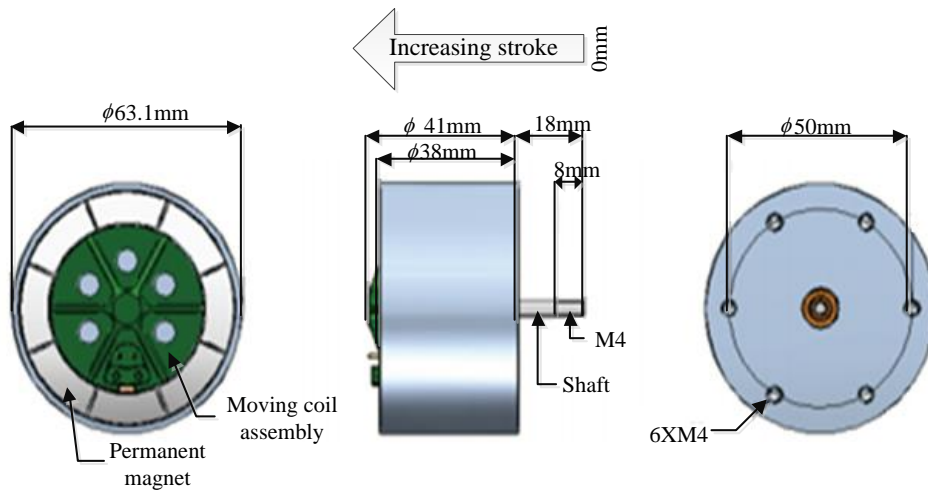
Picture of the voice coil actuator showing its parts and dimensions[155]
